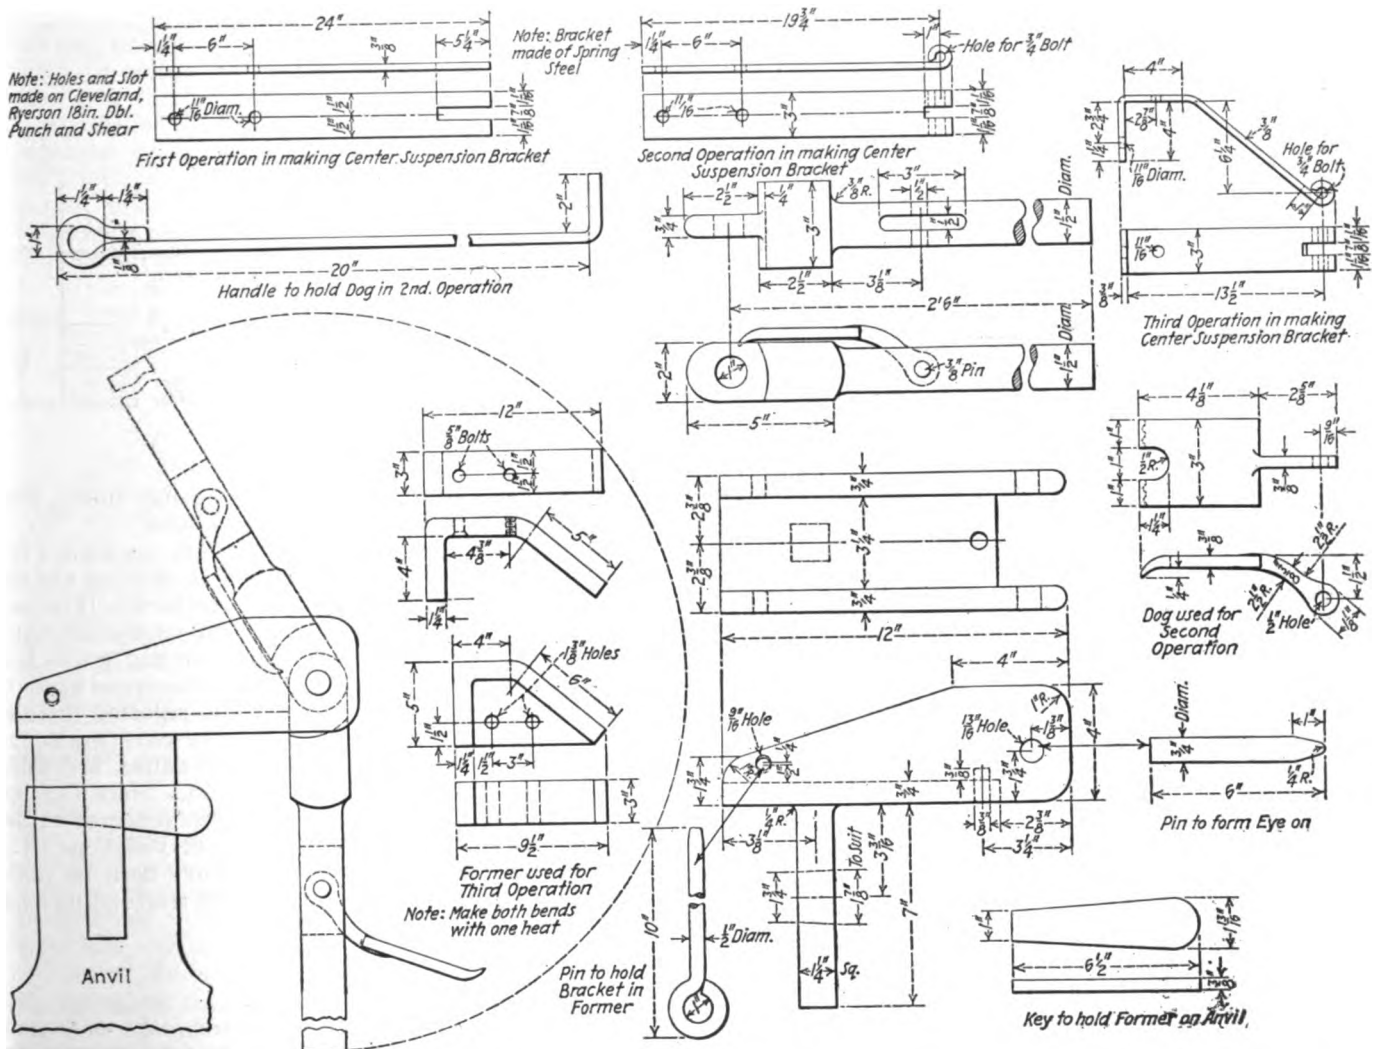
Drawing showing a set of formers for bending center suspension brackets for car lighting generators
